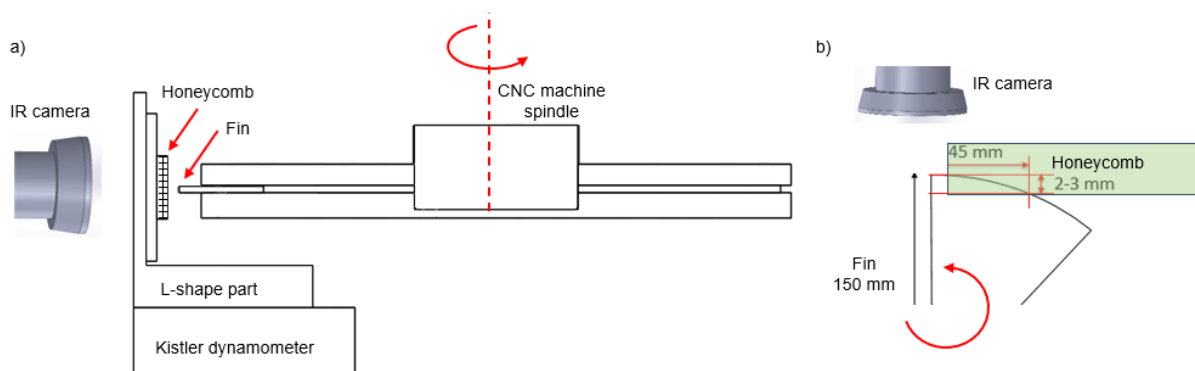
(a) Schematic view of designed set-up. (b) Schematic view of camera position relative to honeycomb sample
